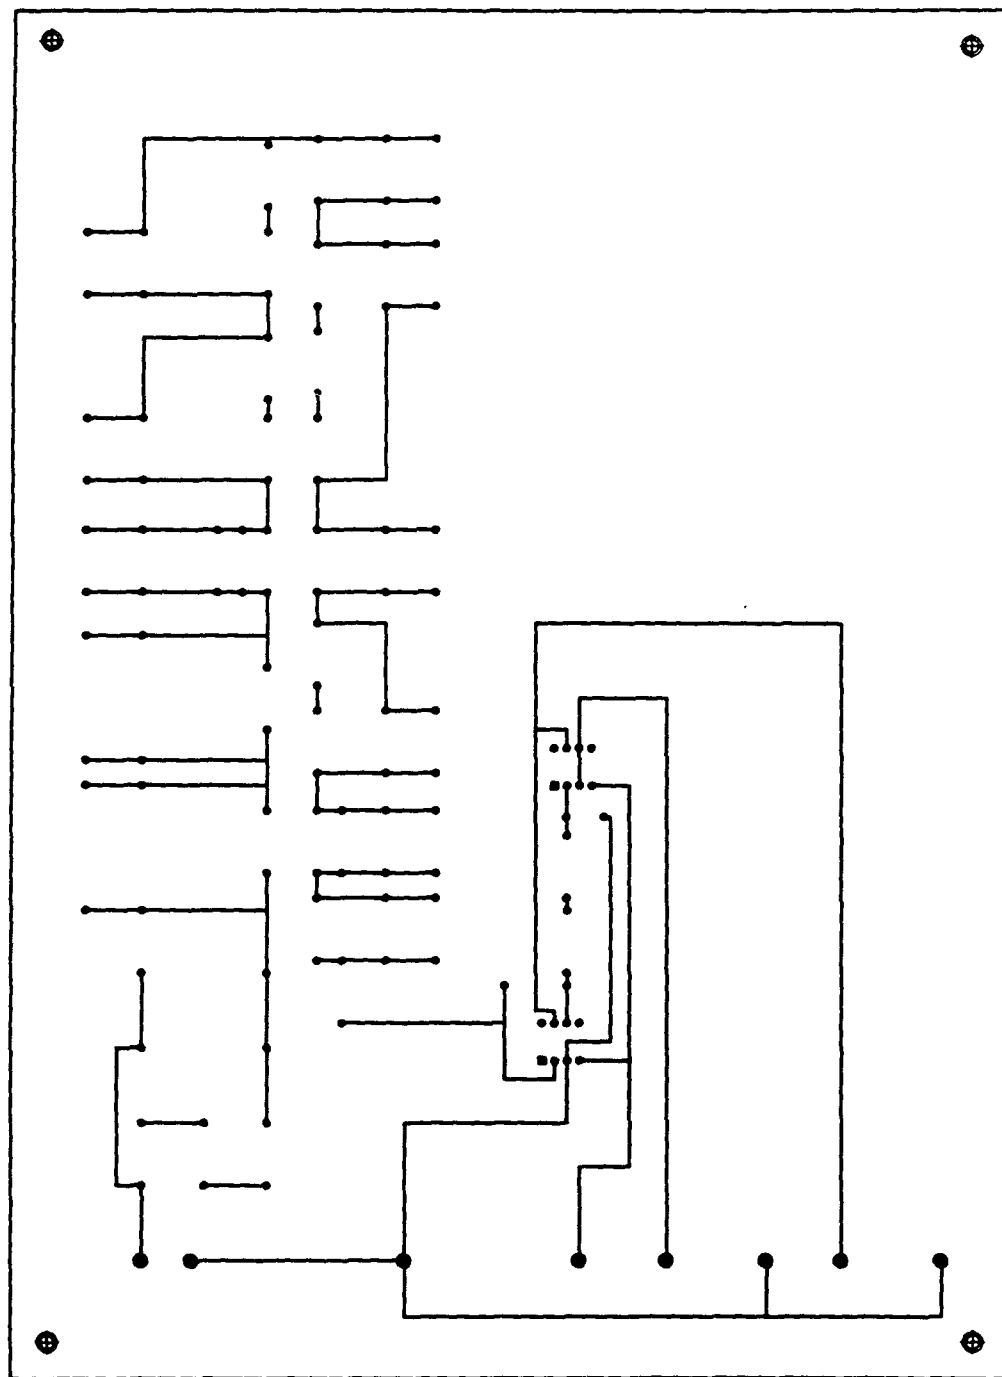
Artwork for the Oldham Discrete Component Printed Circuit Board Design (scale 1 : 1.43).
